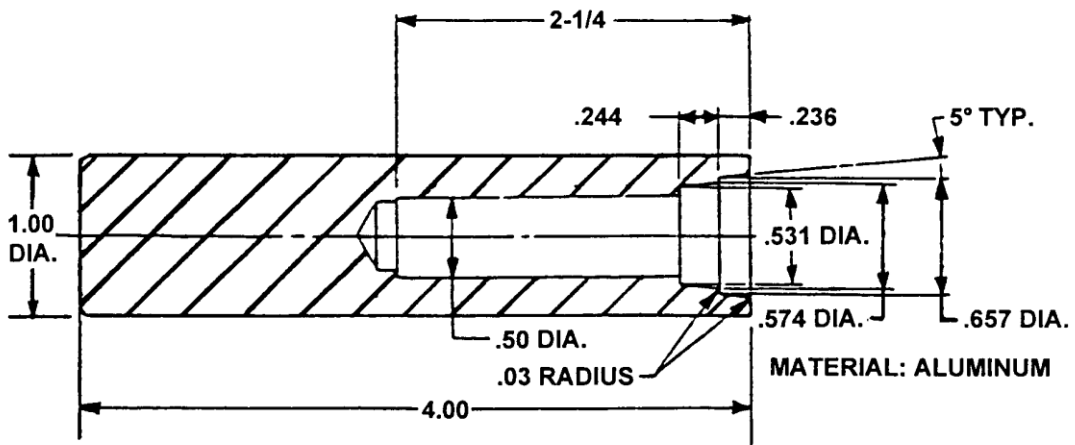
INTAKE GUIDE SEAL INSTALLATION TOOL
